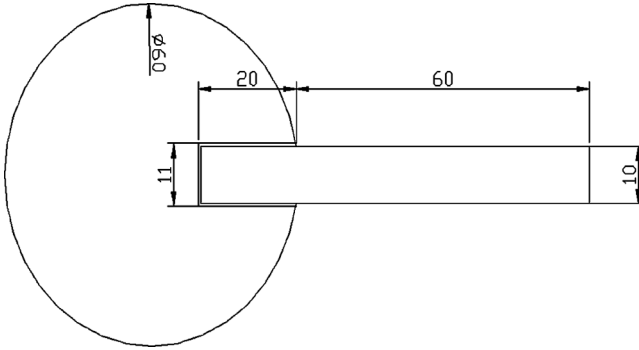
General layout of the proposed new version of double containment joints with circular cross-section corner support.
